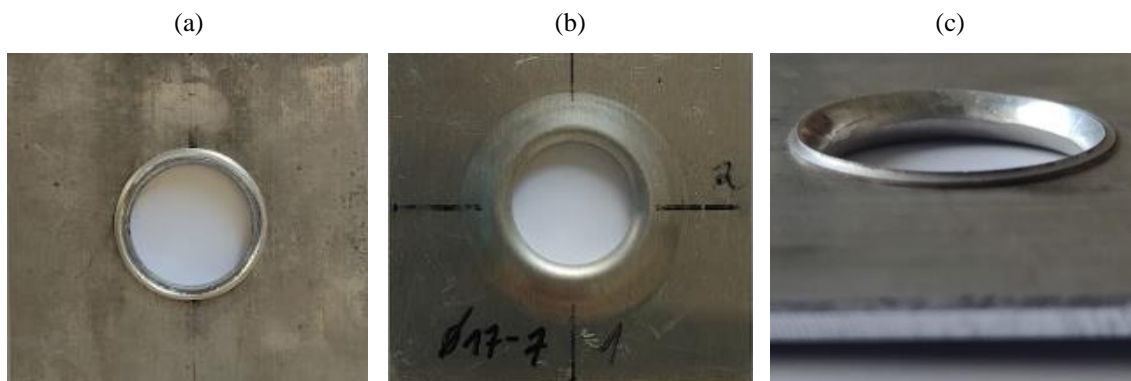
Final joint: (a) top view, (b) bottom view and (c) lateral view.
